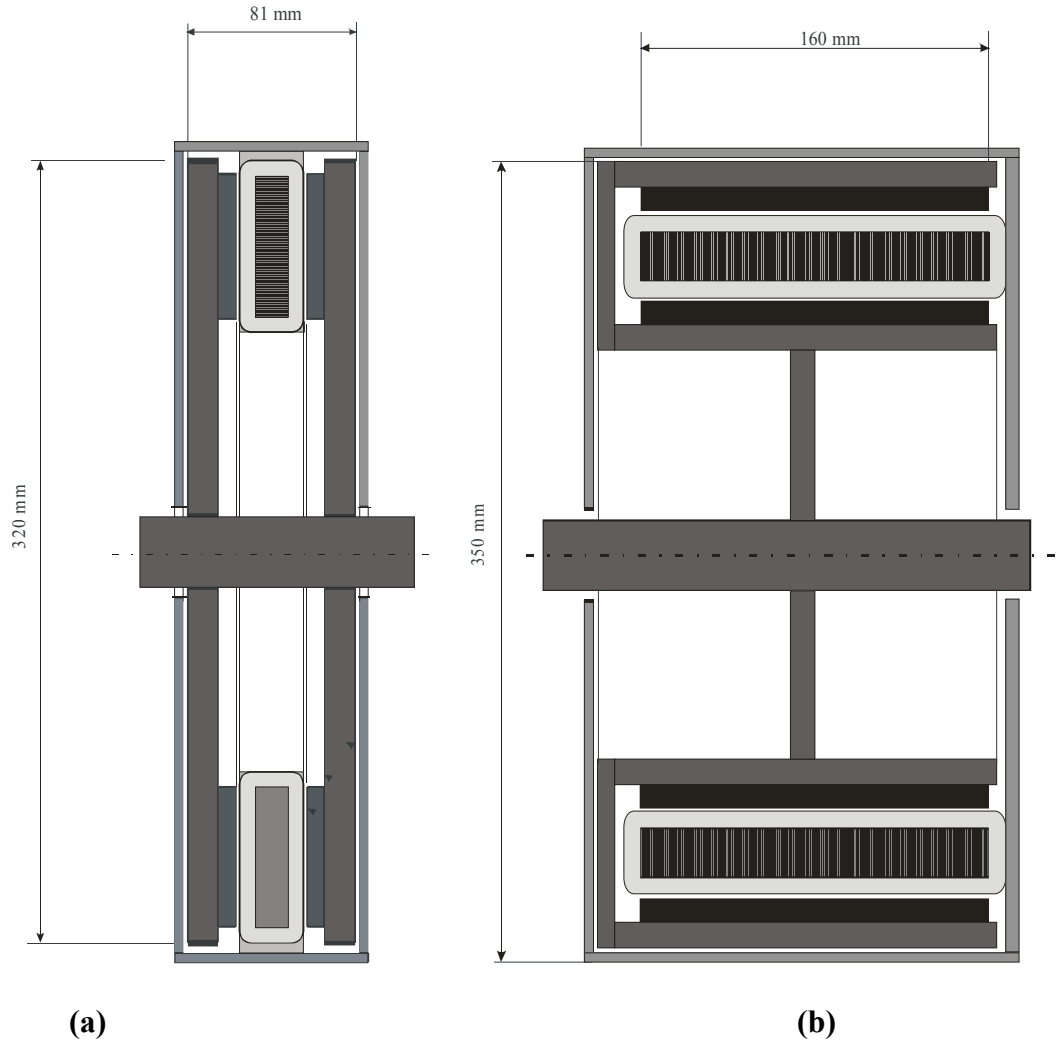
Main dimensions of: (a) disc motor, (b) cylindrical motor
